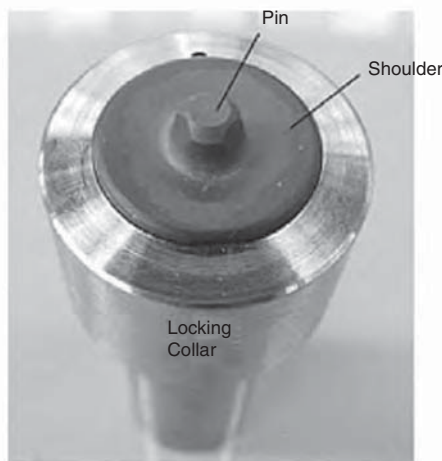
Conventional geometry (smooth concave shoulder, cylindrical pin, three flats) used for welding ferrous alloys
